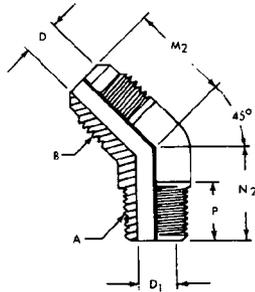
45 DEG REDUCING ELBOW (010302) (E5)
